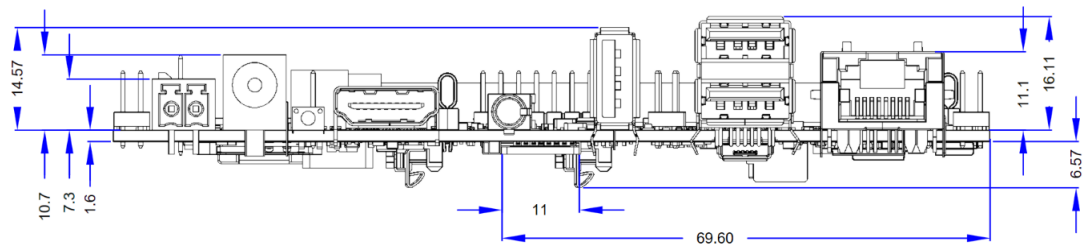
Ixora Carrier Board dimensions (in millimeters) – front side (front view)
